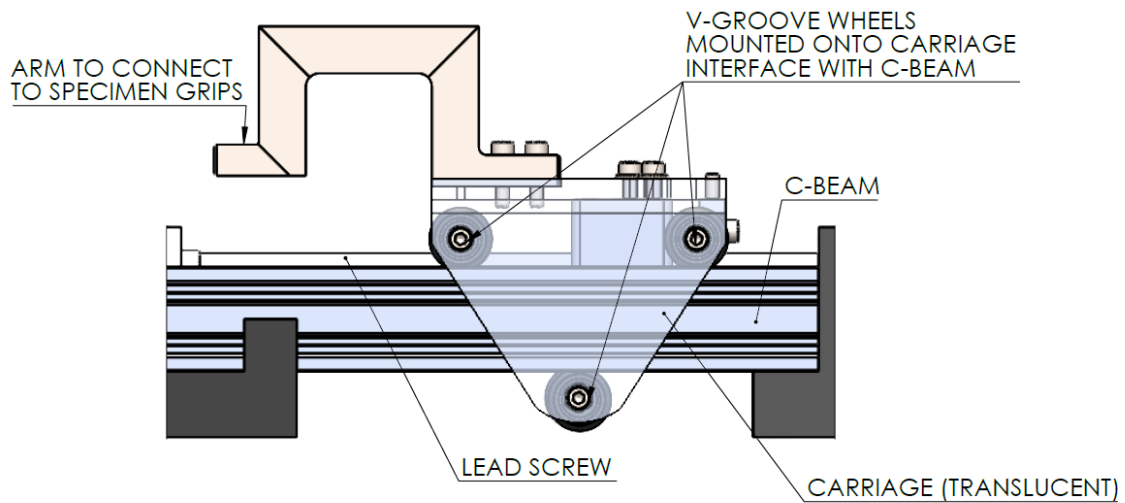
Carriage and aluminium extrusion guide system, side view
